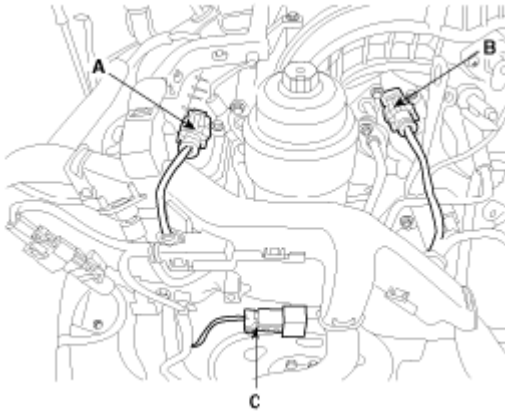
Identifying Connectors For LH Intake Camshaft CMP Sensor, RH Intake Camshaft CMP Sensor, & Condenser
